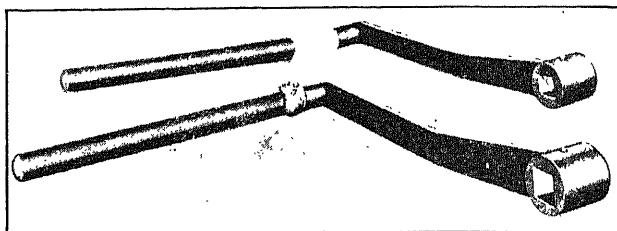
Welded Hoisting Drum Crank Forging.
